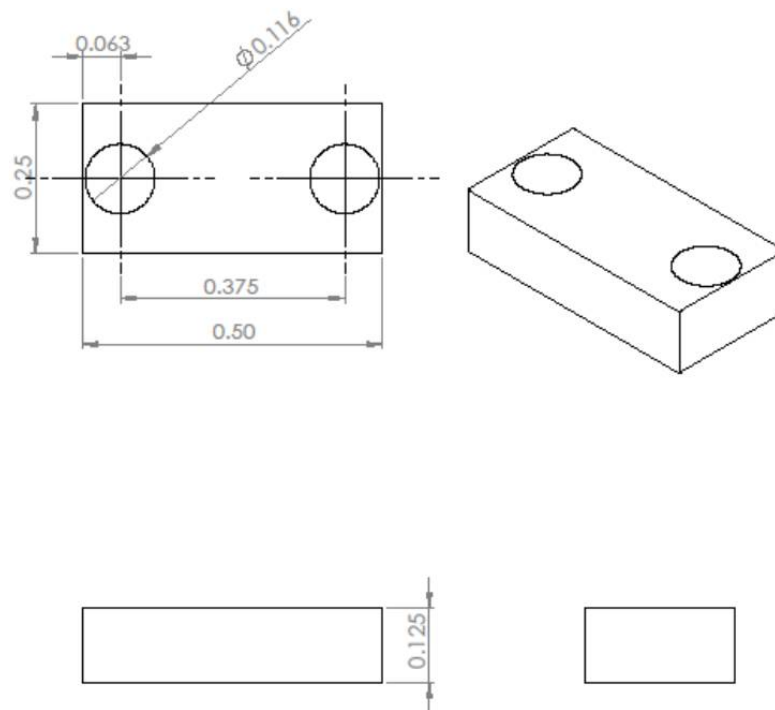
Schematic for top pieces of C-C Fixture. Dimensions in inches.
